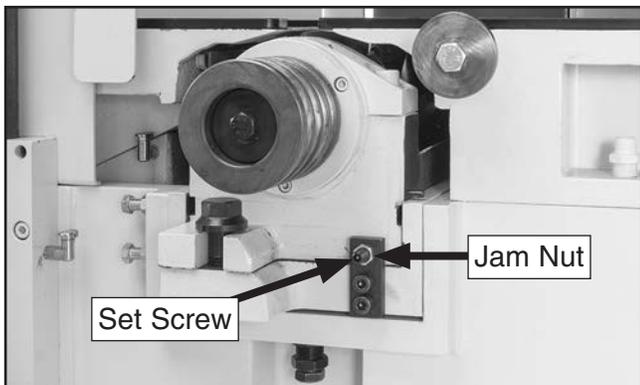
Location of lower cutterhead position set screw. (V-belts removed for clarity.)
